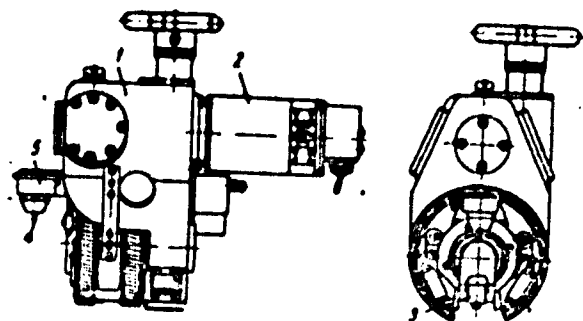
AFH-8-28M (AGN-8-28M) welding head.
